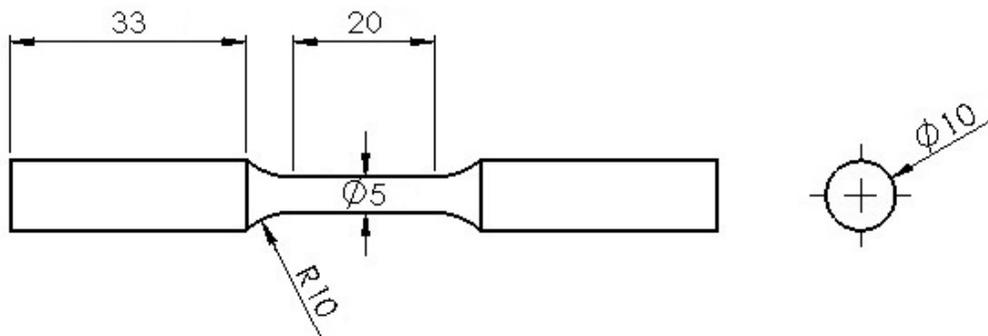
Dimensions of cylindrical tensile fatigue specimens based on ASTM E606 (units in millimeters).
